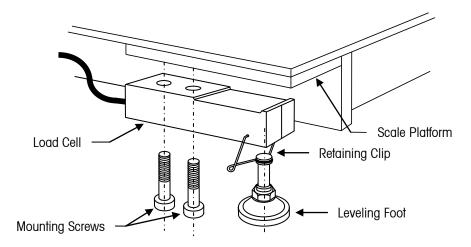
Load Cell and Leveling Foot Assembly (Corner Guard Removed)
